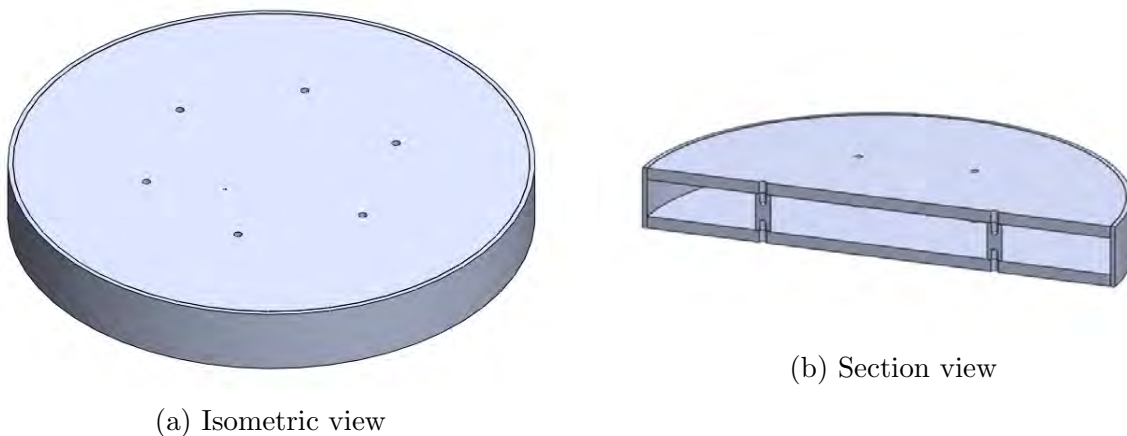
Displacer isometric and section view, showing hollow design and interior supports.
